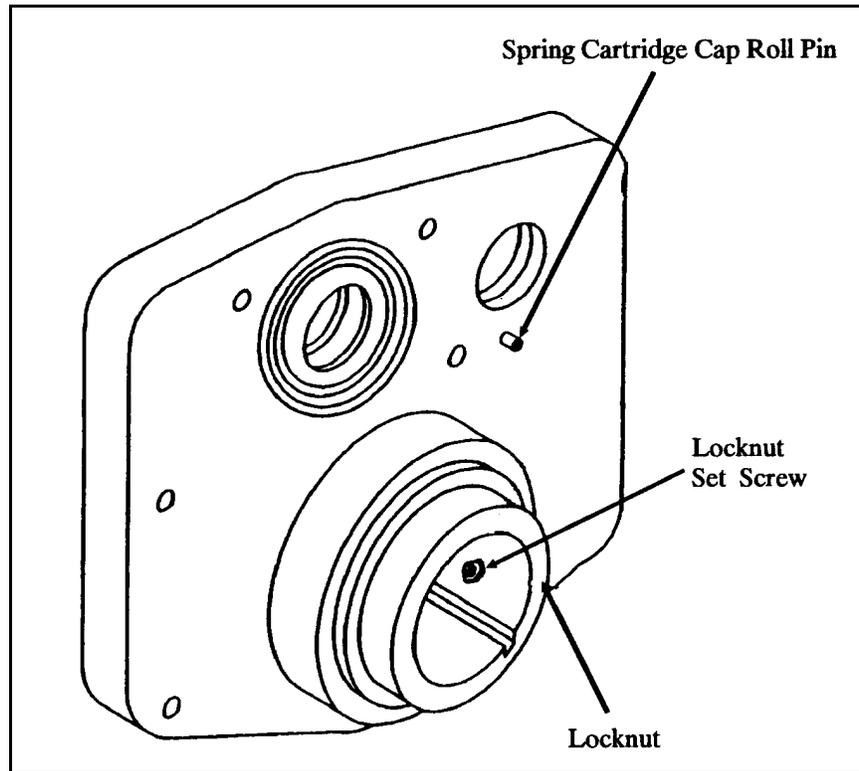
Spring Cartridge Cap Roll Pin Inspection
